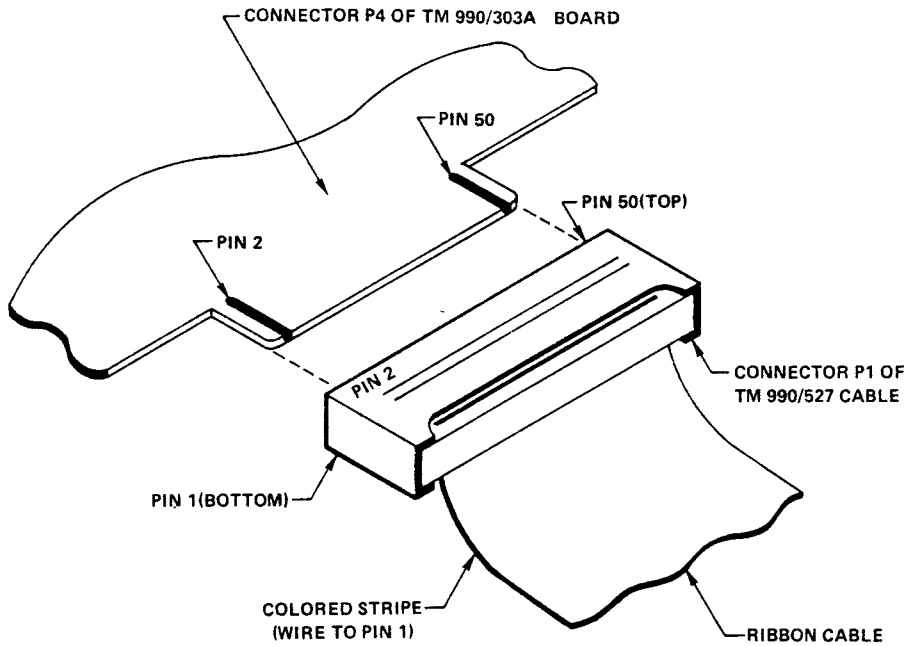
CONNECTING TM 990/527 DISK DRIVE CABLE TO P4 OF TM 990/303A BOARD
